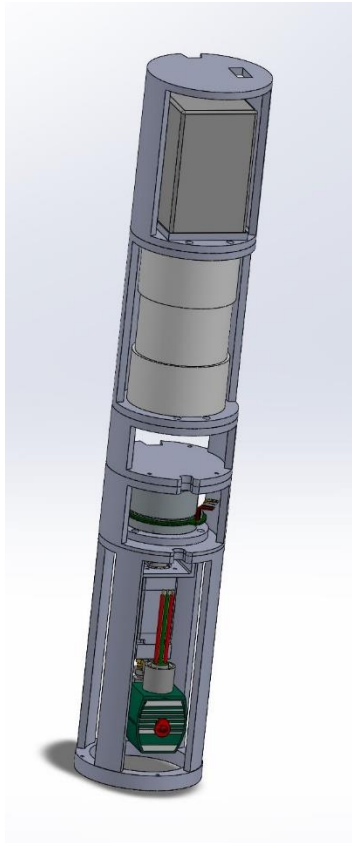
Bottom internal frame assembly, showing from top to bottom the battery, oil reservoir, tube passthrough, oil pump motor, oil pump, and solenoid. Hydraulic lines are not shown.
